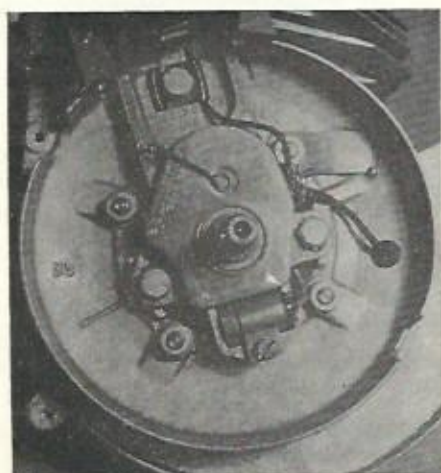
View of Model 275 magneto showing timing mark. Punch mark near center of slot for lower left retaining cap screw should be aligned with raised line on backing plate.
